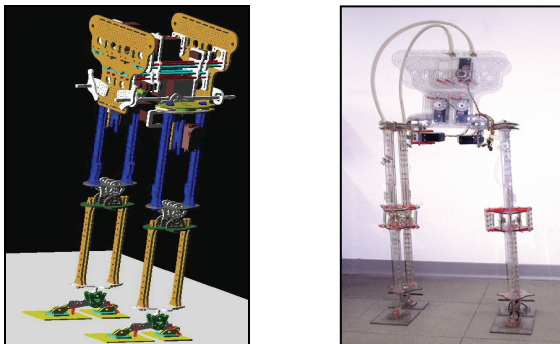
The LARP robot. (a) the ADAMS model, (b) the mechanical prototype with some actuators installed.
